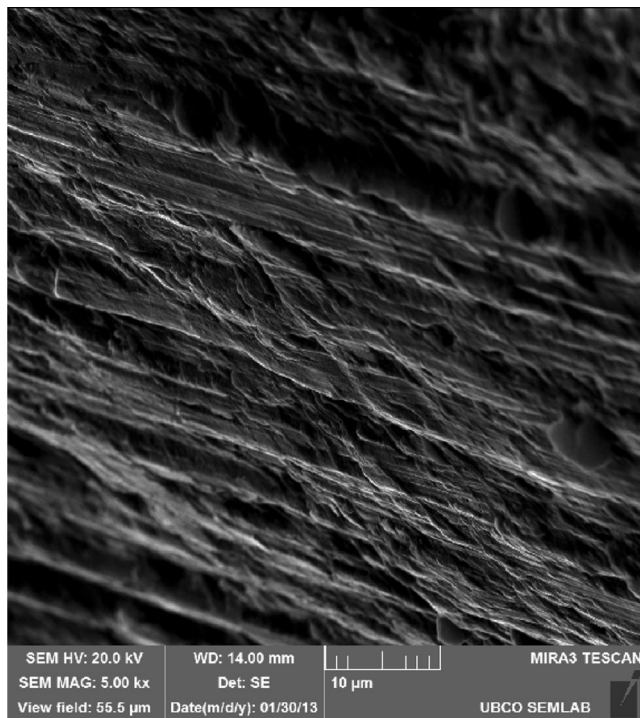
Brittle fracture in some regions of sample 3n or hot weld ($\times 5,000$)
